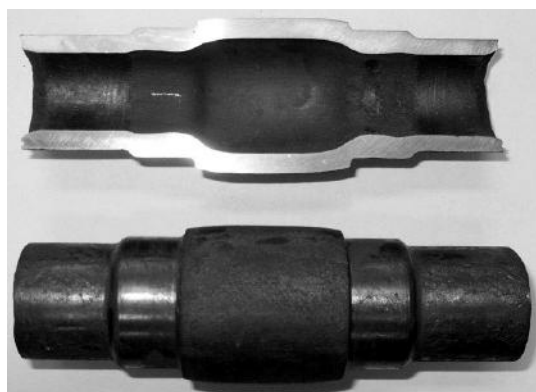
Hollow stepped shaft forgings formed over a mandrel in the process of rotary compression.
